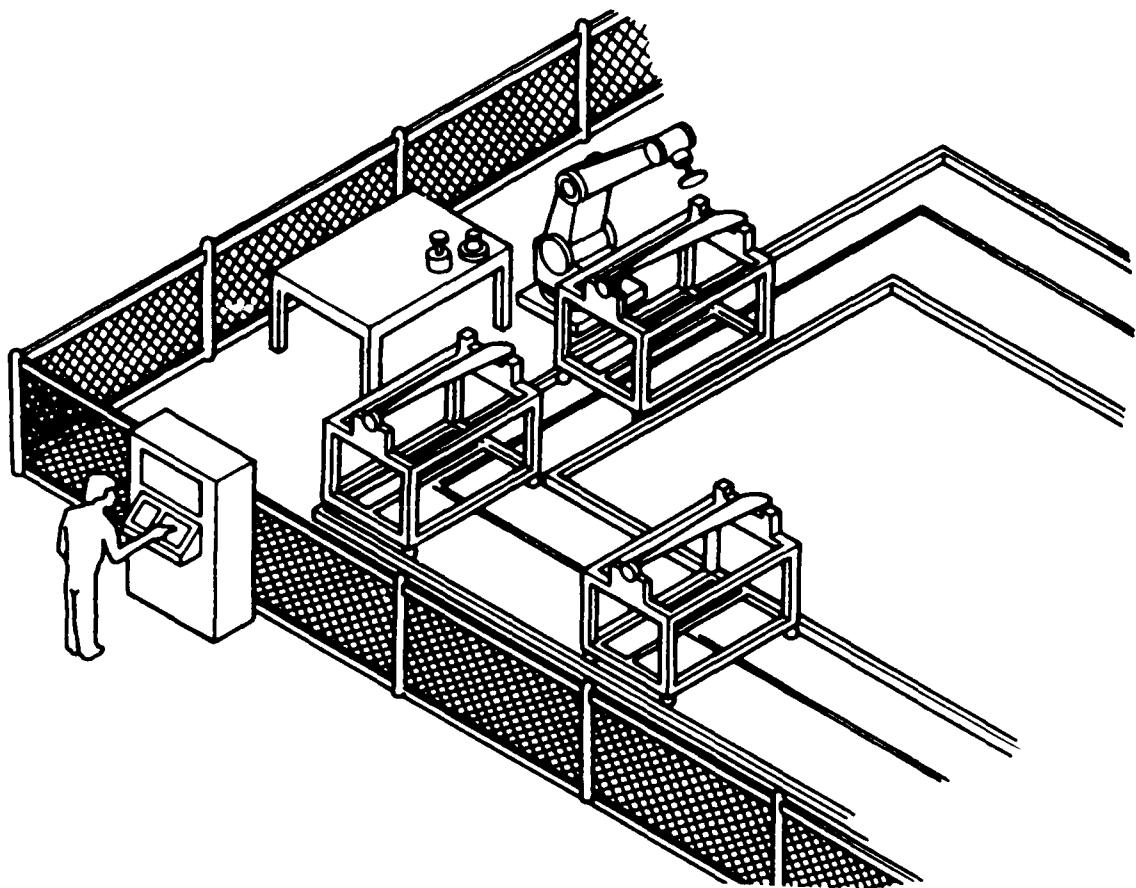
C-130 PROPELLER GRINDING SYSTEM. Blades are mounted on the racks and attached to the automatic material handling system. One a first-in-first-out basis they are moved into the grinding/polishing station, where they are mounted in a fixture and positioned for grinding. The robotic grinder grinds the blade using successively finer abrasives. The vision system locates nicks and corrosion pits and provides input to the controller, which controls the time and force of the operation. The blade contour and width are monitored continuously and can be provided in printout form if required. Since the contour and width are available at all times, no separate gauging station is needed.
